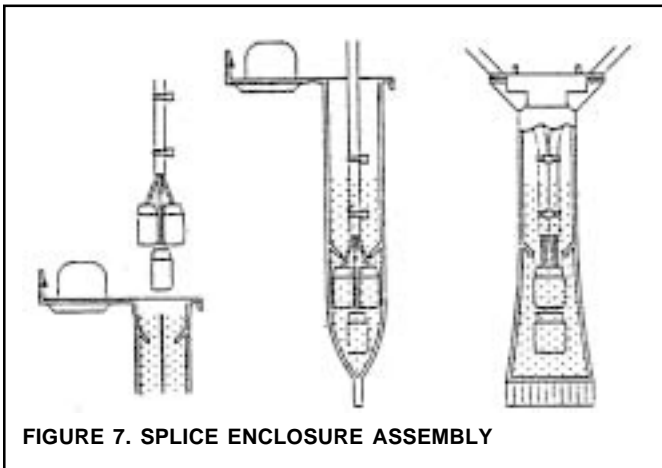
SPLICE ENCLOSURE ASSEMBLY
